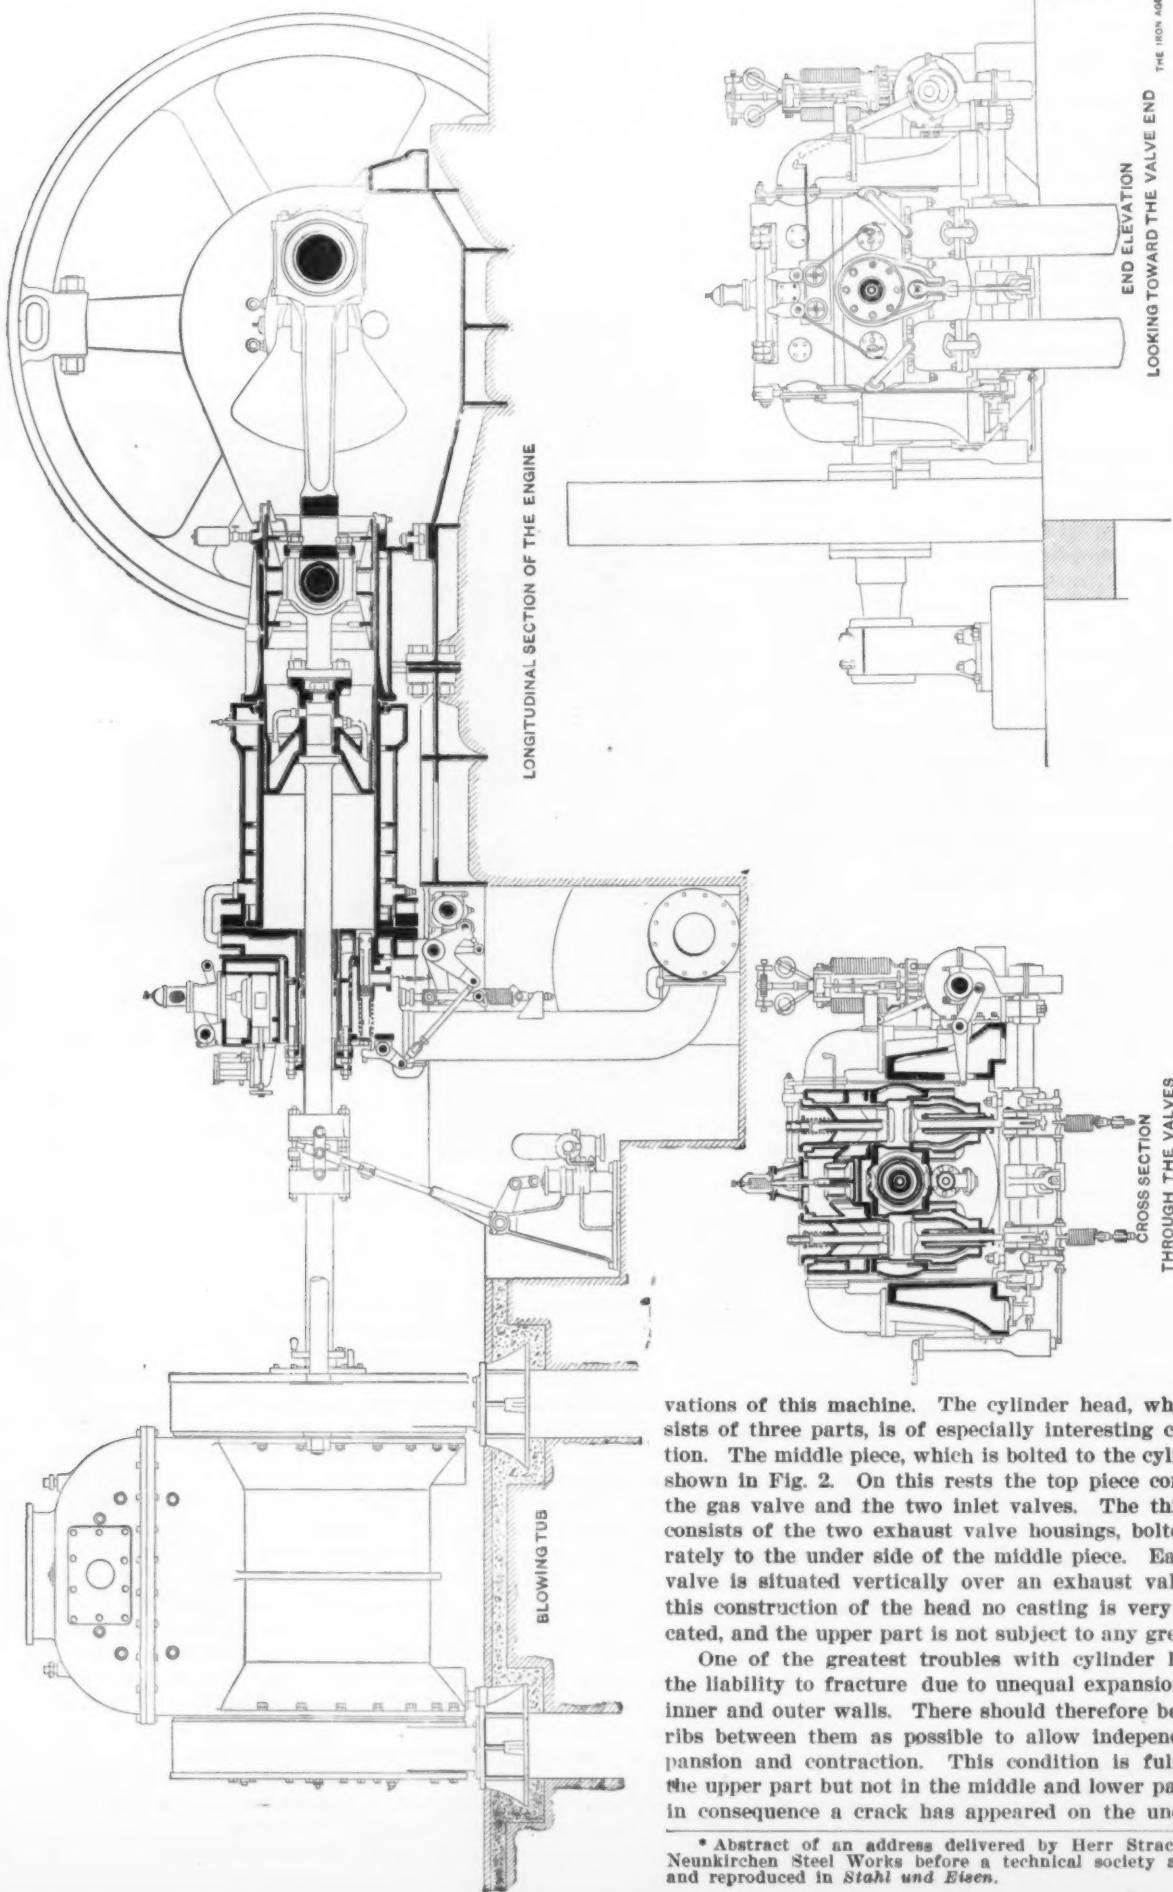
Sections and Elevations of the First Gas Engine Used at Neunkirchen, Built by the Nuremberg Machine Company
